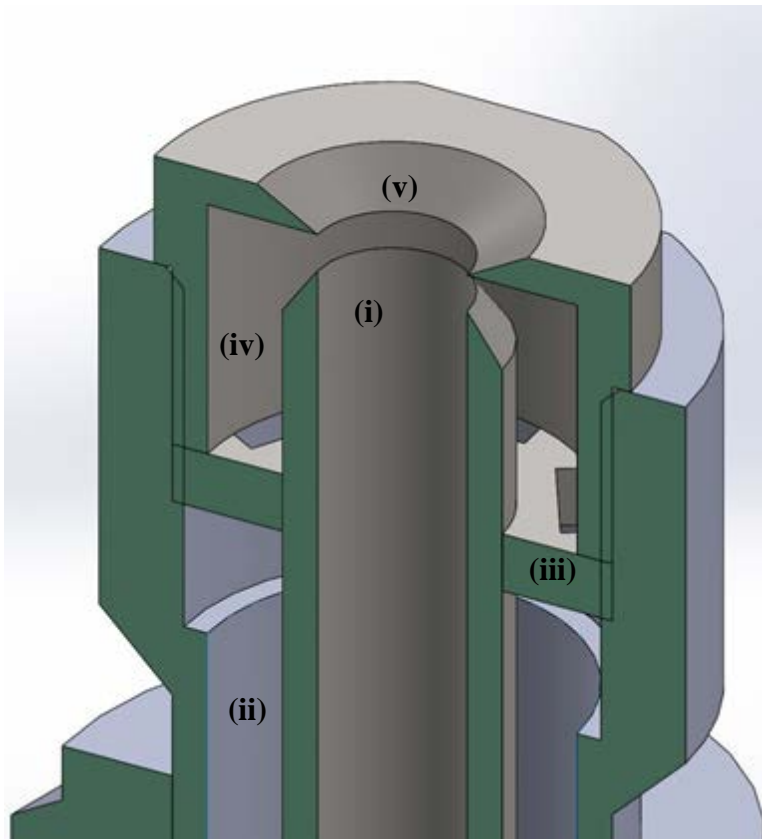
Detailed, cross-sectional view of the atomizer subassembly. The fuel tube (i), annular air tube (ii), strainer plate (iii), air manifold (iv), and atomizer orifice (v) are shown.
